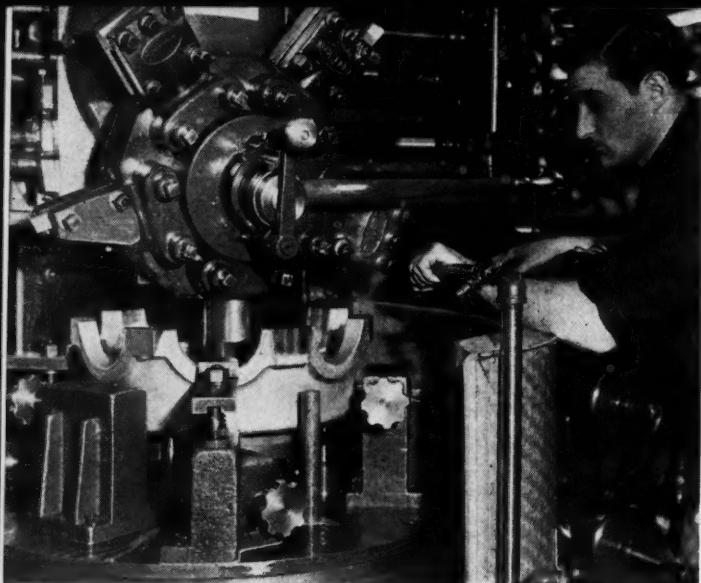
Boring the center hole in the middle crankcase section. This hole is held to limits of 0.0002 inch.
